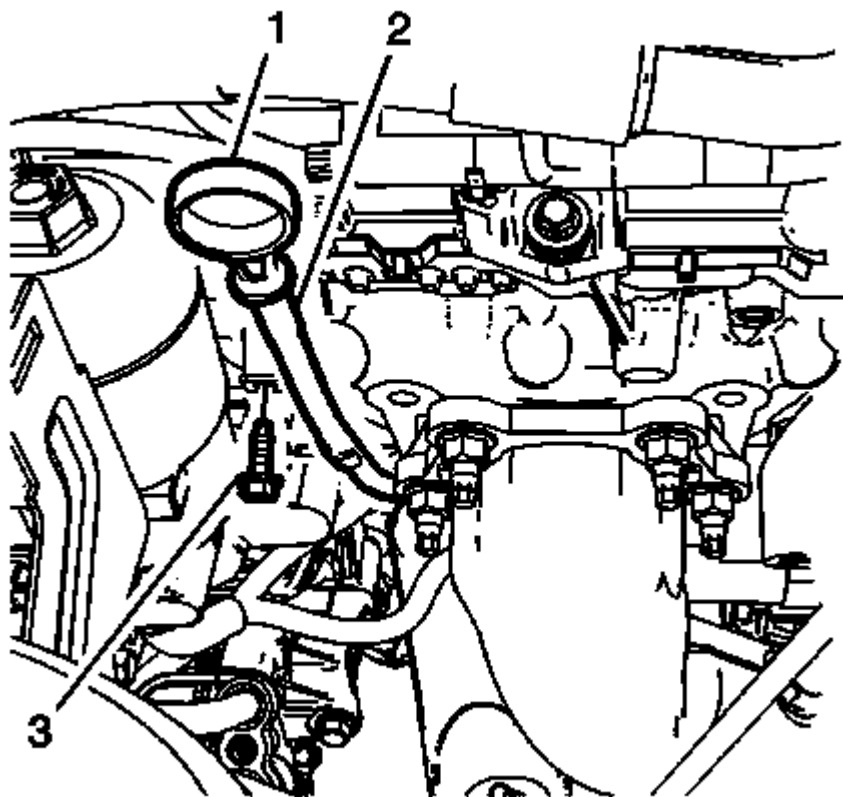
Oil Level Indicator, Tube & Cylinder Head Retaining Bolt
